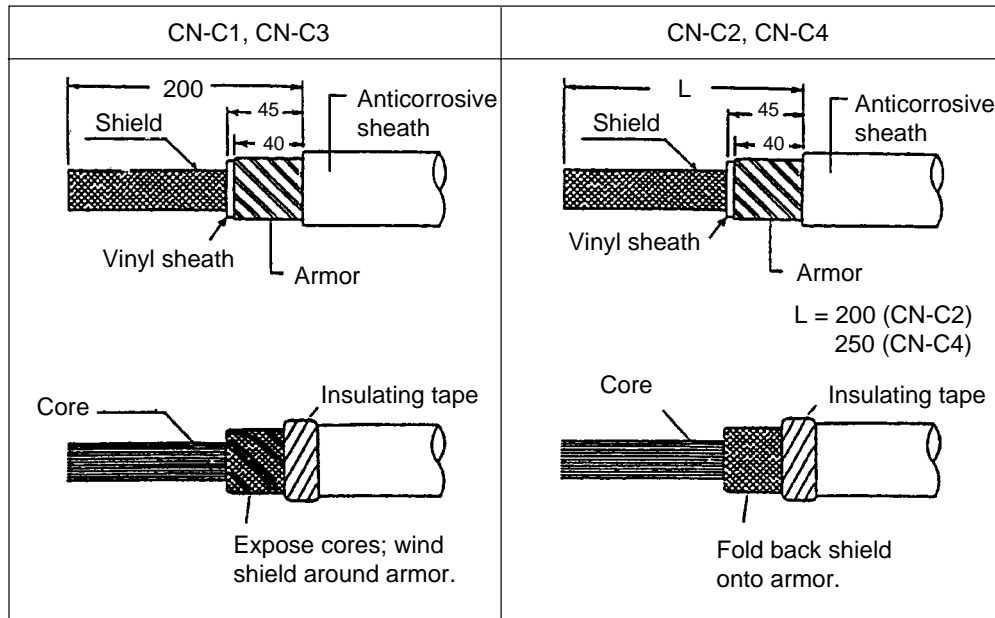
Fabrication of cable for 38P and 20P connectors
